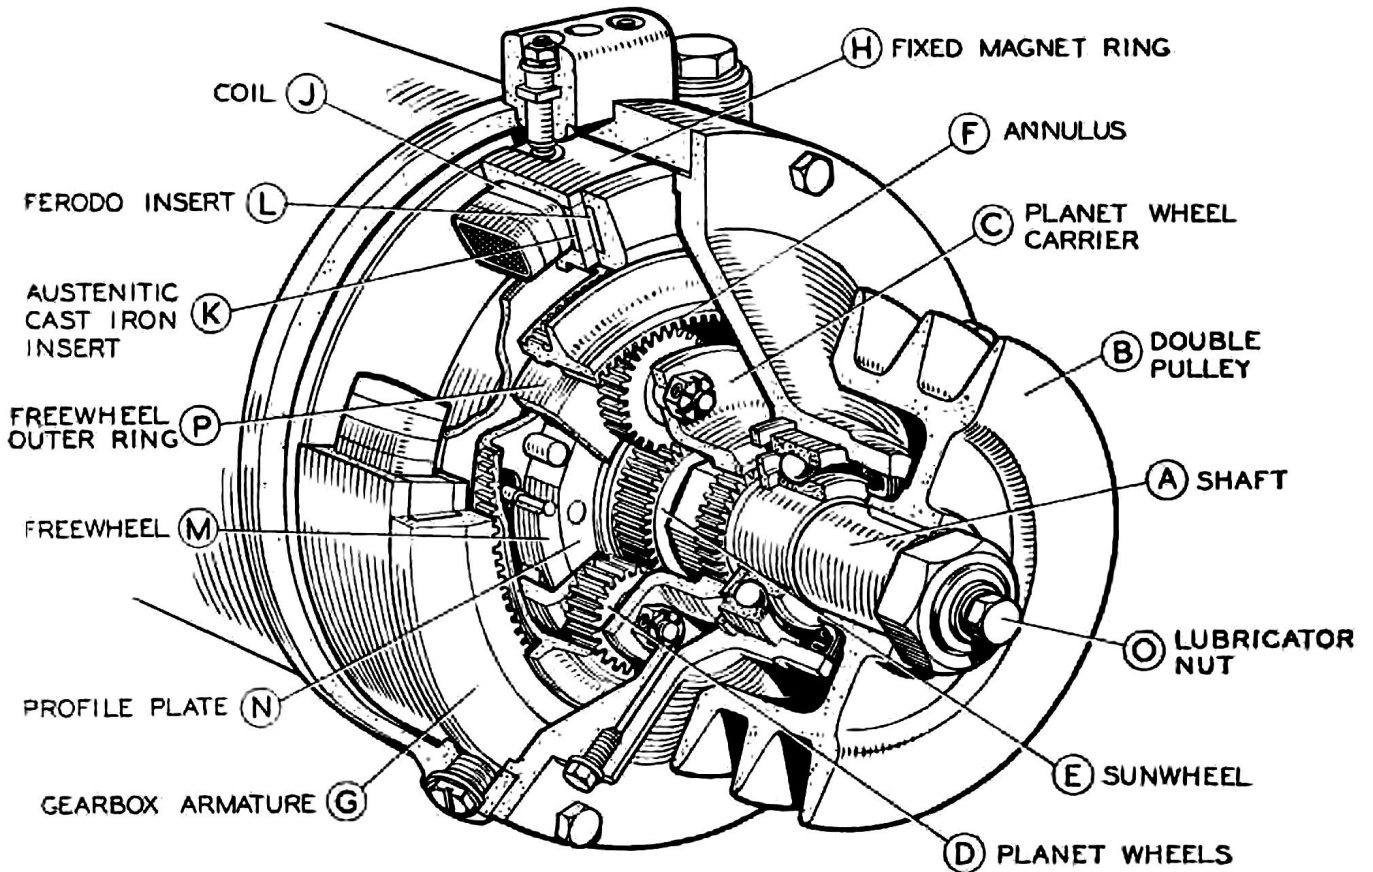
SECTION OF DYNAMO GEARBOX.
